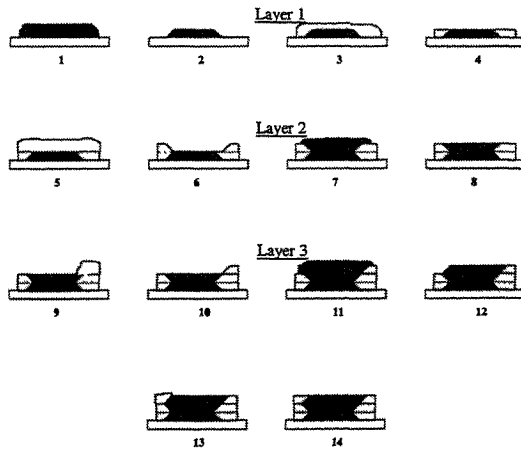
Shape Deposition Manufacturing. The construction of the first 3 layers of a part is shown [14].
